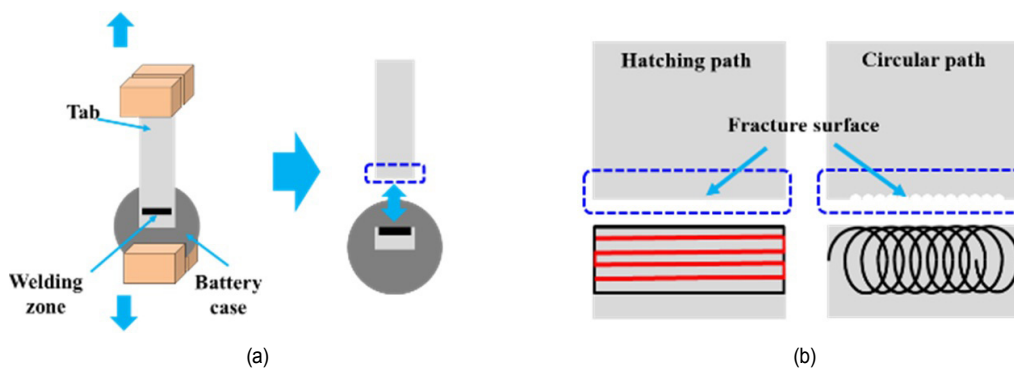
Fracture mechanism: (a) strength test; (b) fracture surface.
